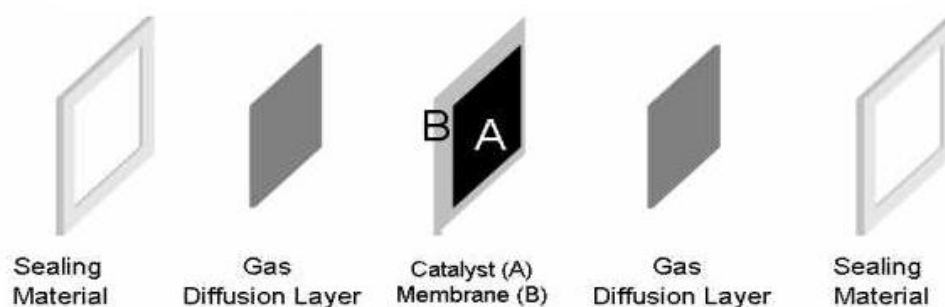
Exploded view of Membrane Electrode assembly (MEA) [14]
